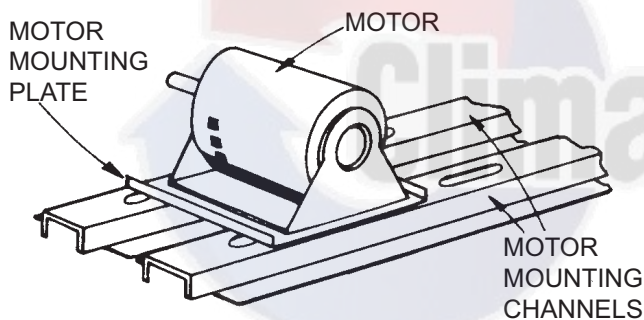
Typical Motor Mounting Assembly and Motor - NE240
